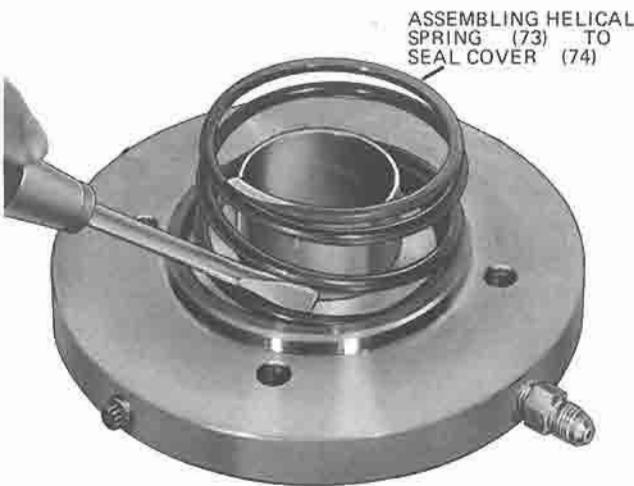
ASSEMBLING CARBON RING AND SPRING TO REAR COVERPLATE
